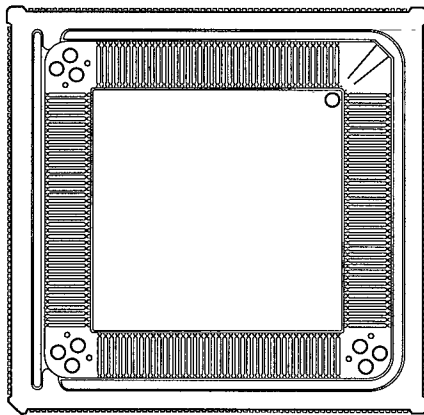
160-Pin QFP (with Molded Carrier Ring) Package Dimensions (1 of 3)
